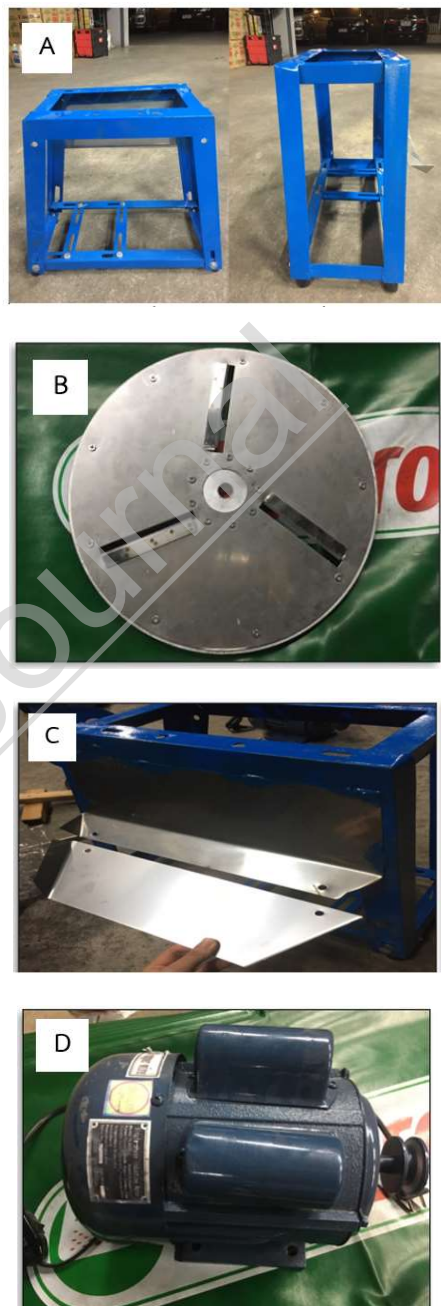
Main components of durian flesh slicing machine. (A) Machine structure (B) Blade (C) Supporting tray (D) Motor
